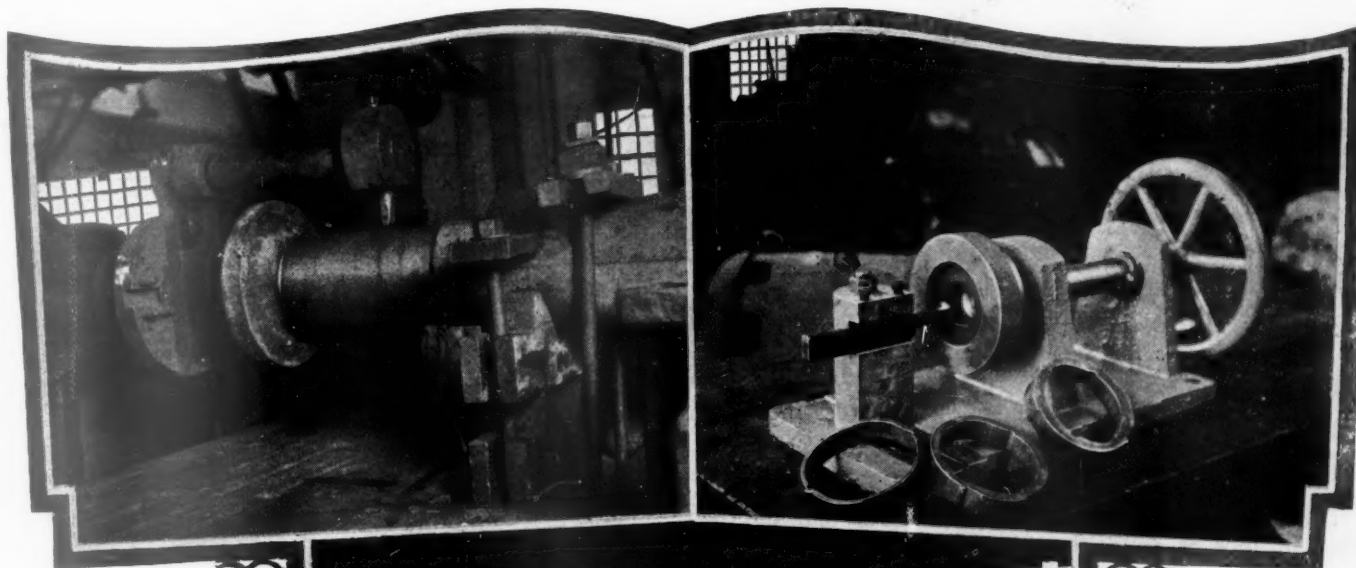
The upper left view shows a method of machining a steam pipe fit on a horizontal boring, drilling and milling machine.
